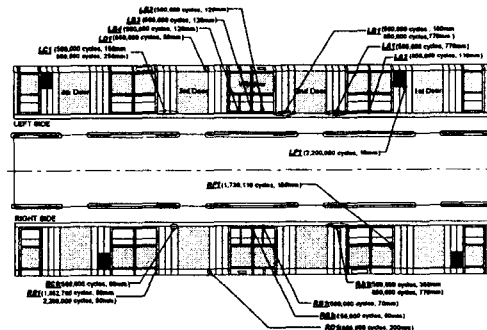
Fatigue cracks occurred in the car-body
